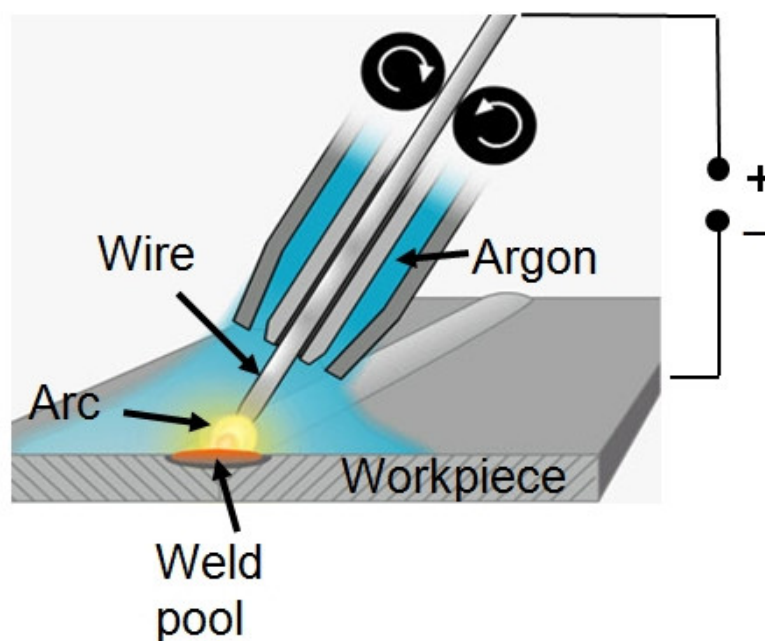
Schematic of the MIG (metal inert gas) welding process. For MAG (metal active gas) welding, oxygen or carbon dioxide is added to the argon. © IOP Publishing. Reproduced with permission from [30]. All rights reserved.
